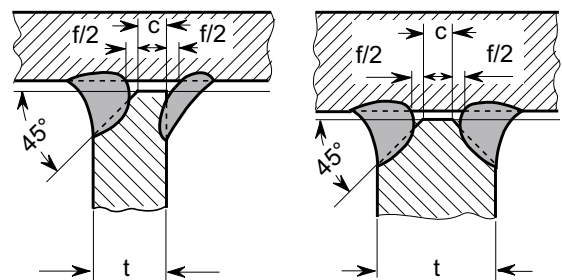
Single- and double-bevel welds with unwelded root face and defined incomplete root penetration
